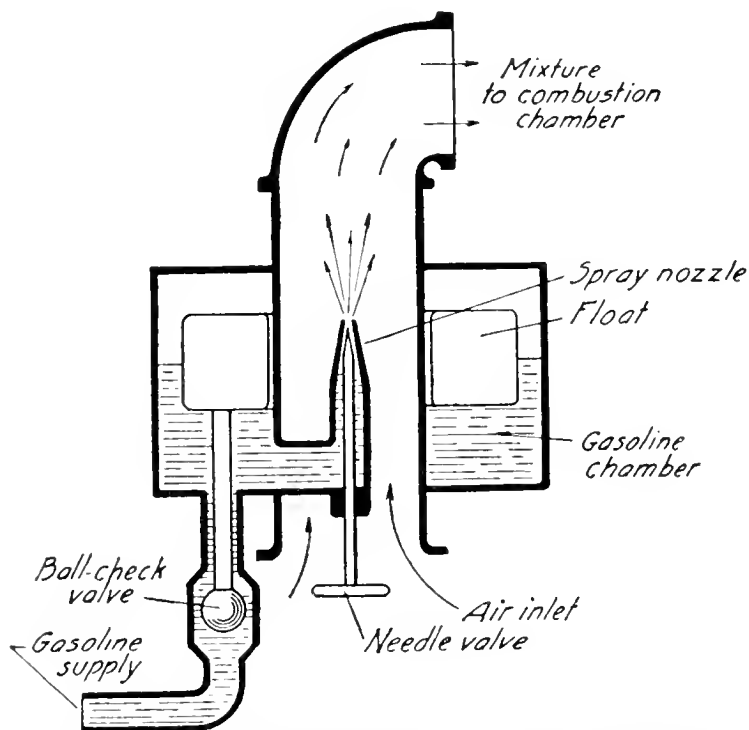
Showing the parts of a spray-nozzle or atomizer carburetor and their relative positions
